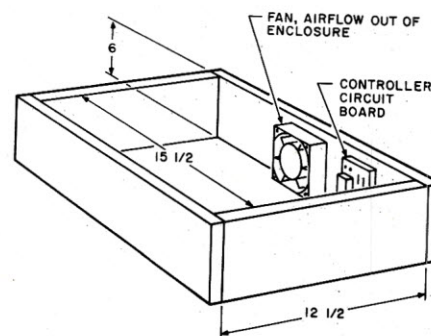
The dimensions of the enclosure for the printer cooling fan. All dimensions are in inches. With these inside dimensions, the rubber feet on the printer base are a snug fit in the enclosure to prevent movement of the printer. For clarity, the interconnecting cables are not shown. To minimize air leakage, use self-adhesive foam weather strip in the top of the base to seal against printer base. Mount the fan in the middle of the board.
